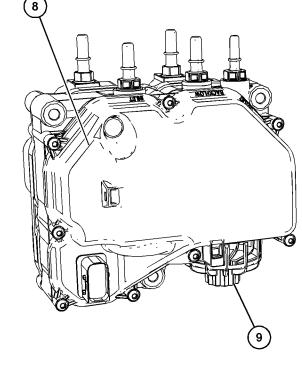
Typical example (8) DEF pump (9) DEF filter cap
